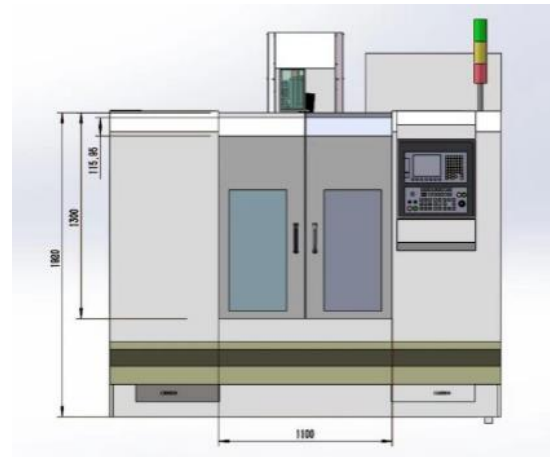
Dimensional drawing of the CNC control on the left guard of the machine tool
